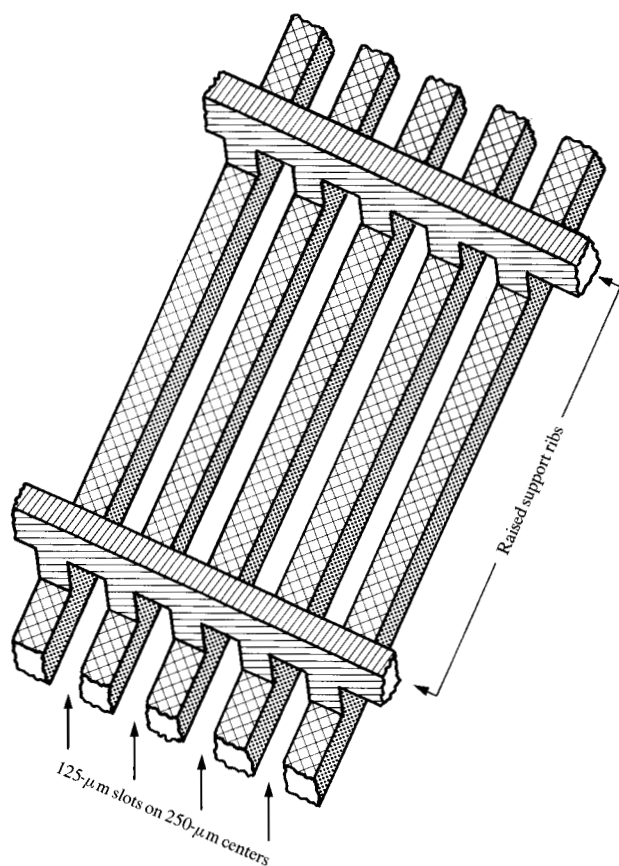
Section of one piece graphite rib-supported mask fabricated using machine shop techniques.
